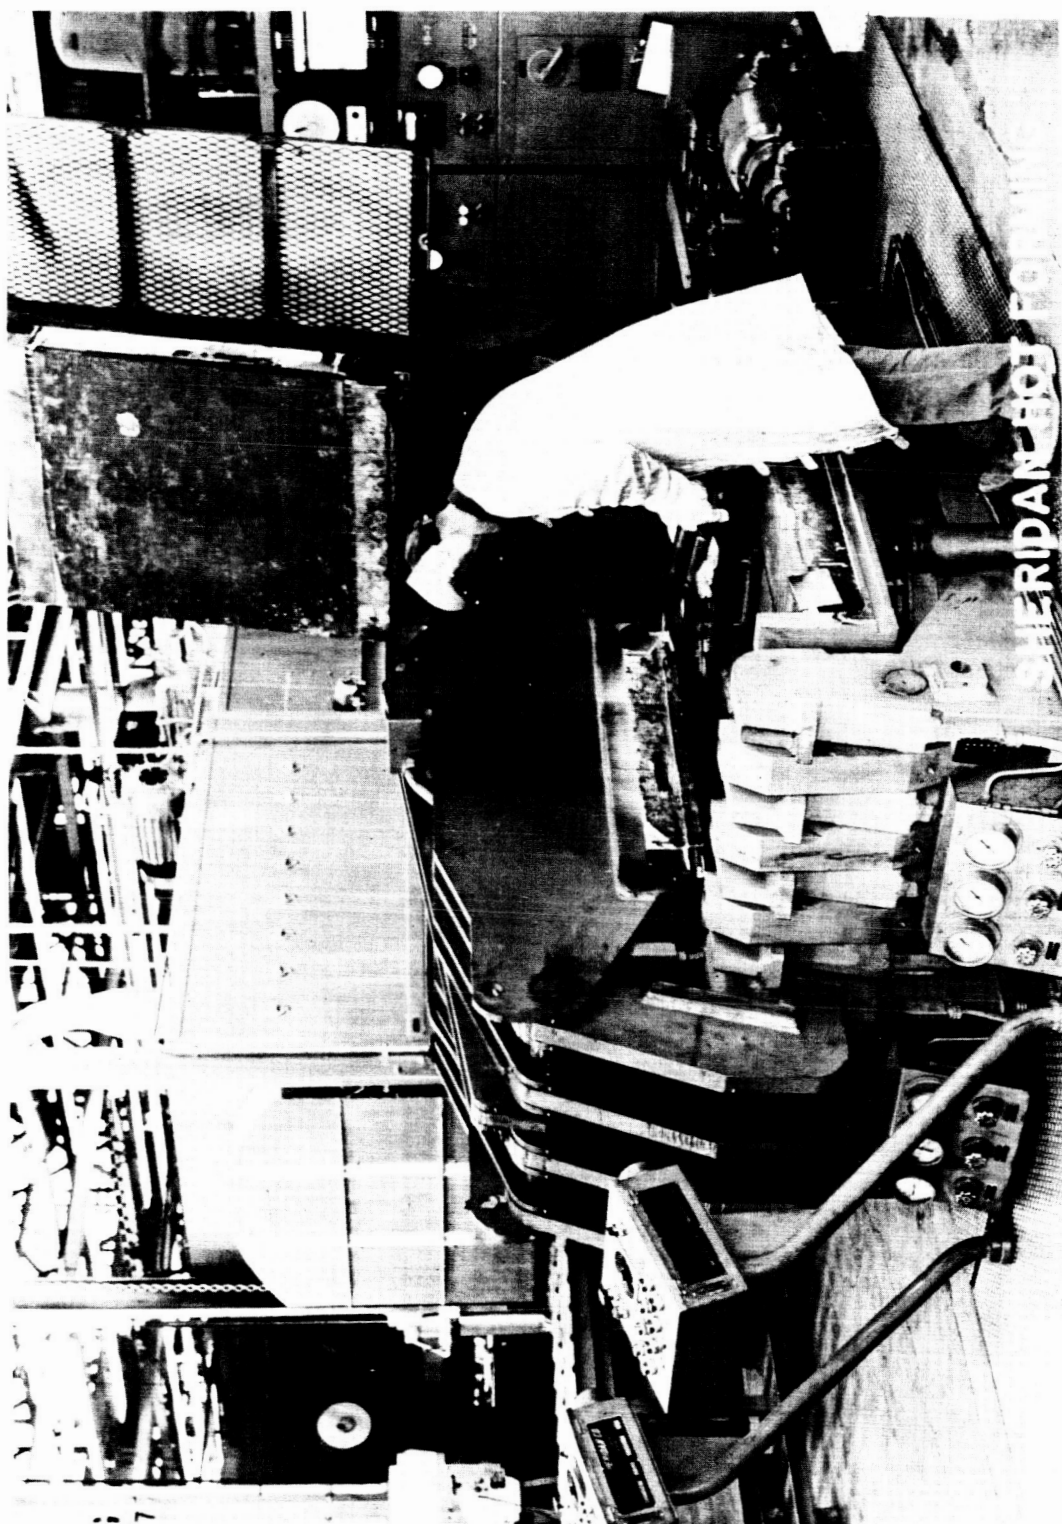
SHERIDAN HOT-SIZING MACHINE (REF. 101)
